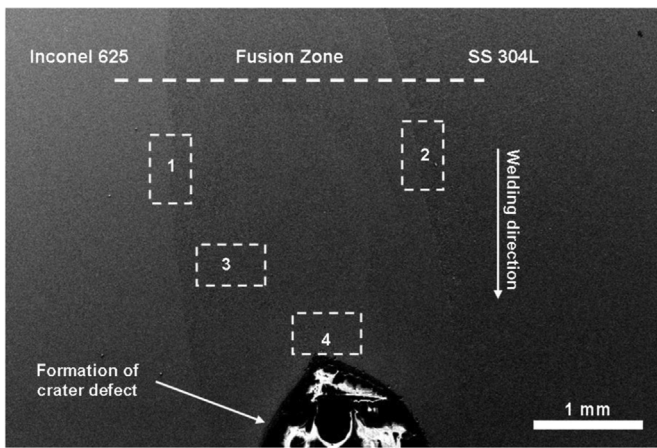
SEM micrograph of Inconel 625/SS 304L weld at optimized welding conditions.
